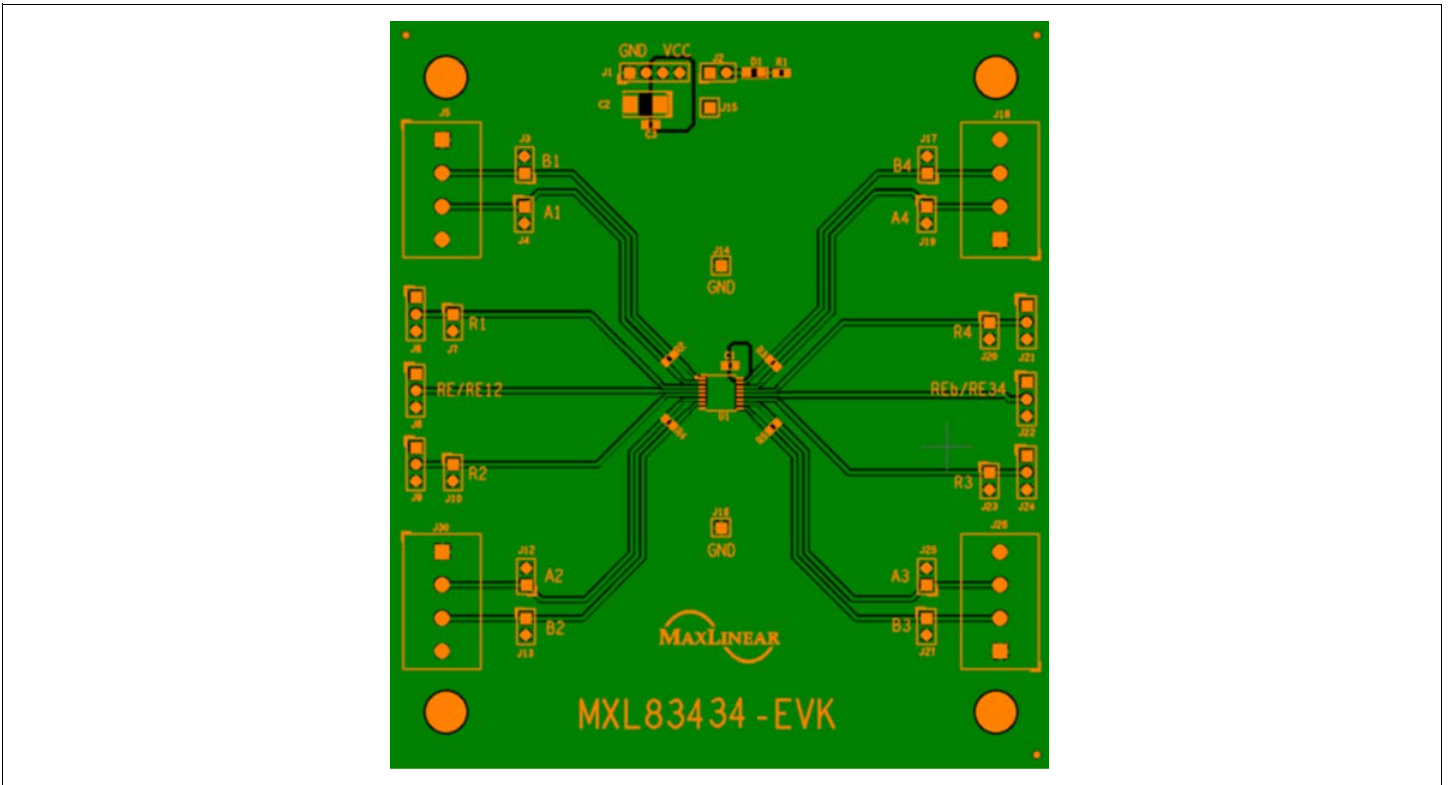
EVK PCB Layer 1—Top View (TSSOP16)
